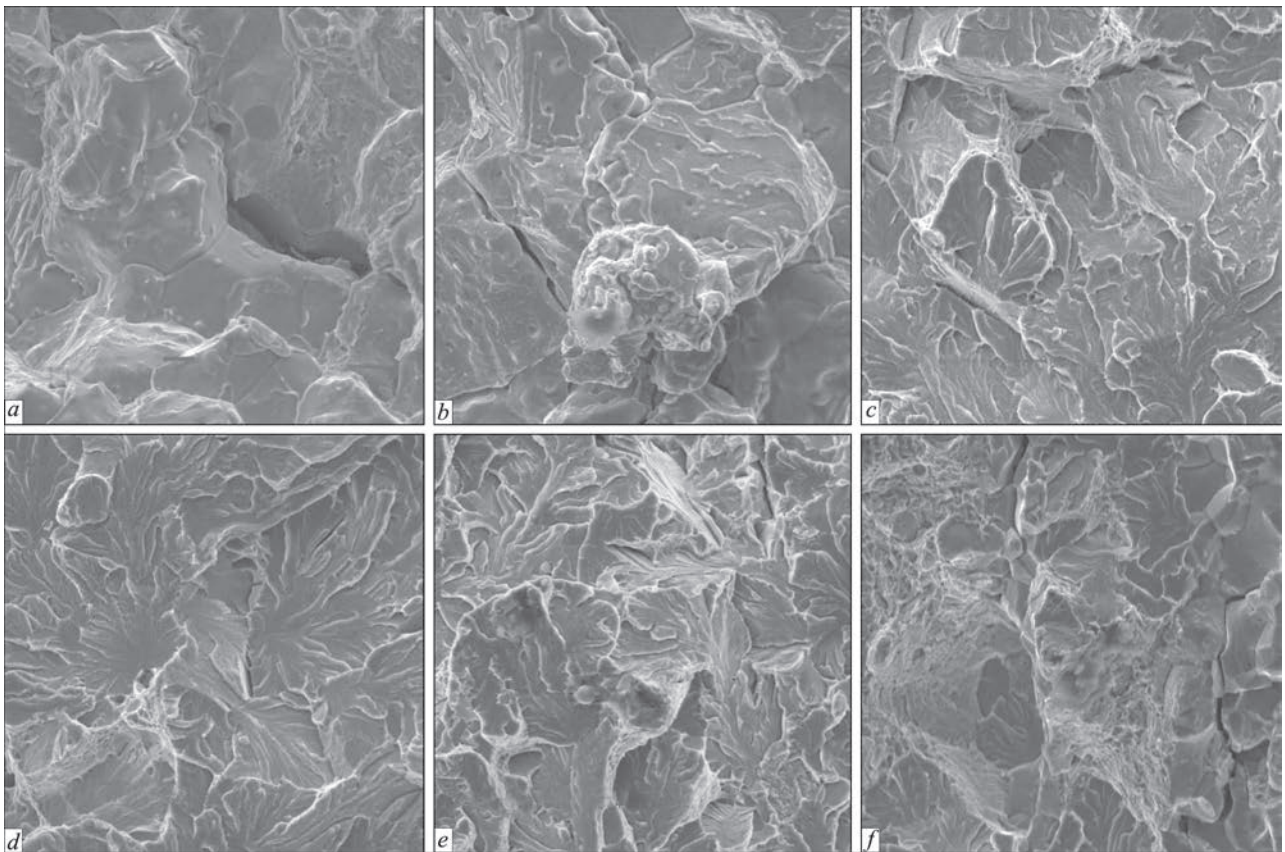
Zones of sample fracture after testing: I — fatigue crack; II — main crack; III — final fracture zone
